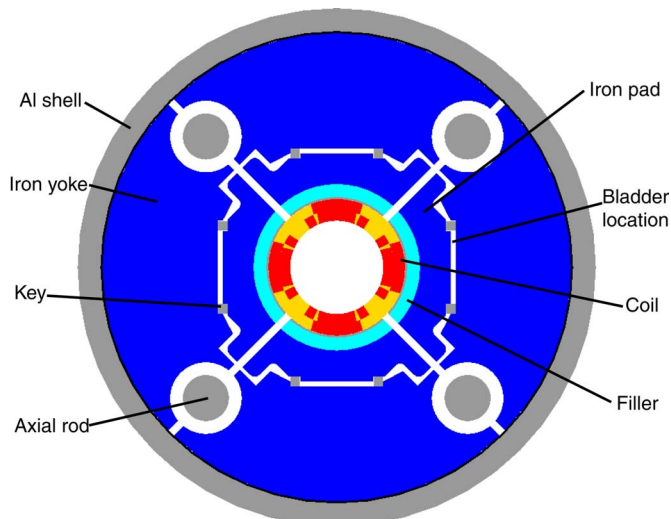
TQS01 magnet cross-section showing coils, fillers, pads, keys, yokes, skin and axial supporting rods.
